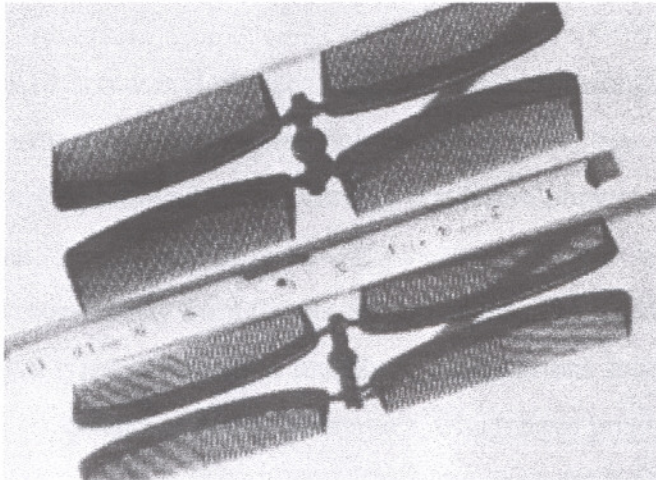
Combs produced by injection molding technology (Dubois 1972, p.273)
